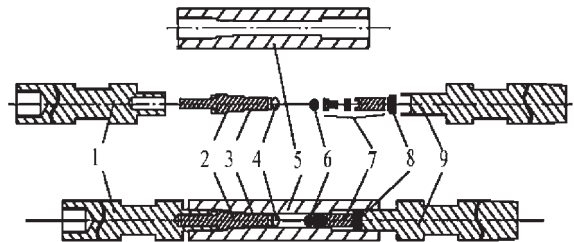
High pressure CuBe microcell for magnetic studies in a SQUID magnetometer, with inner diameter 2.5mm: 1, 9—upper and lower pressure clamping bolts; 2—plug; 3—sealing; 4—sample; 5—pressure cell; 6—Pb pressure sensor; 7—piston; 8—piston backup.
